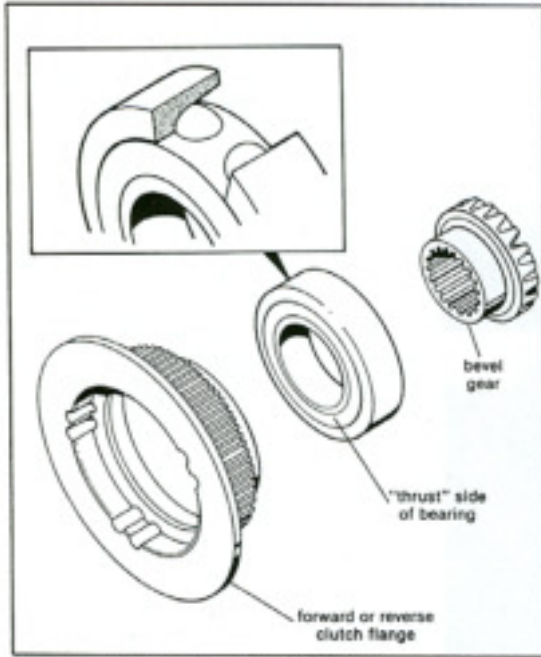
Clutch end flange, bearing and bevel gear. Bearing must be installed so that "thrust" side of bearing is toward clutch flange.
